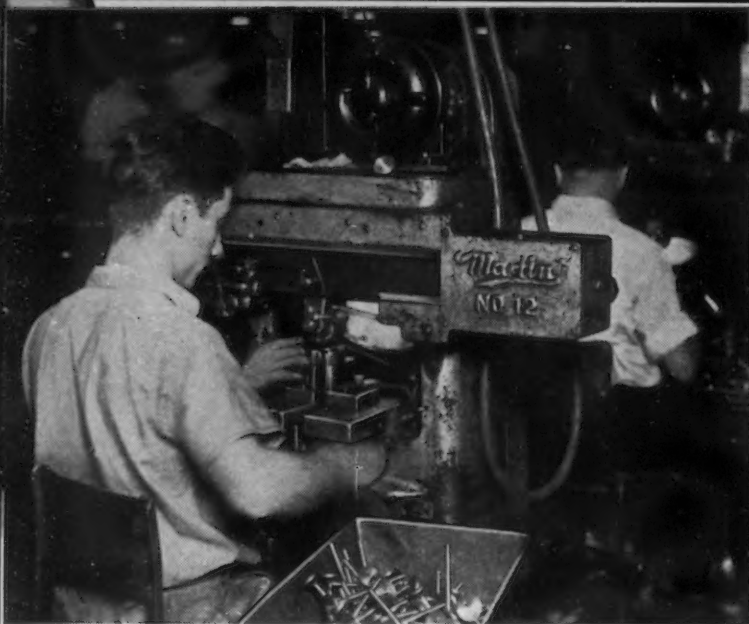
Valve heads are marked without distortion by passing them under a roller provided with raised characters.
